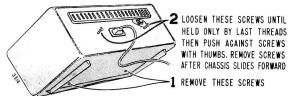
Rear View of Cabinet Showing Chassis Mounting Screws.
